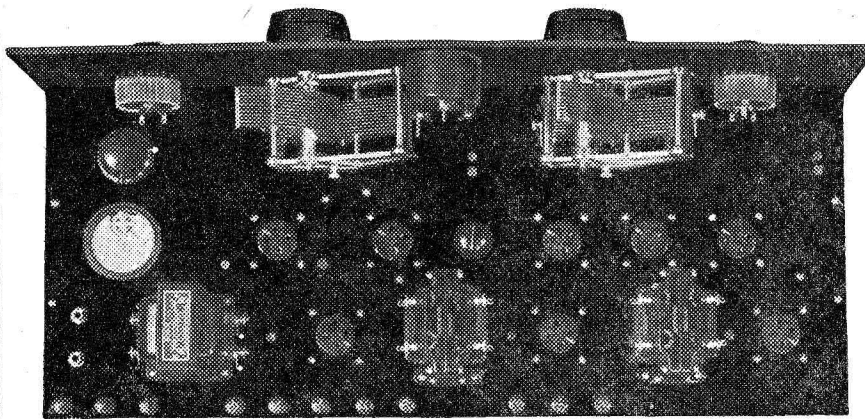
Top View of Assembled Receiver, Showing All Parts in Place
